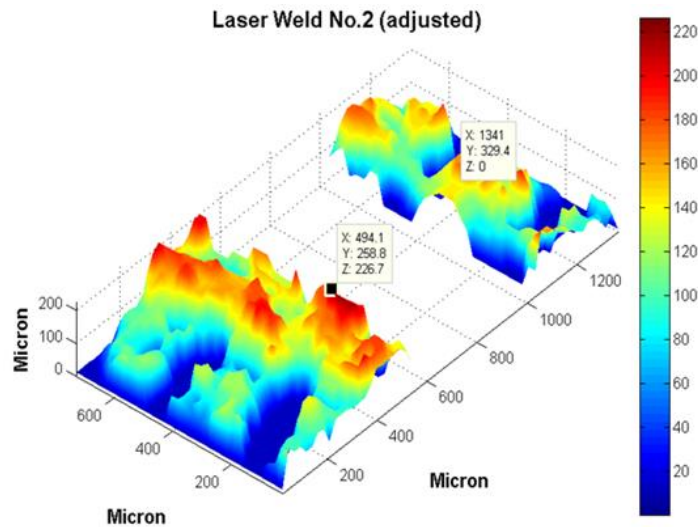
Adjusted measurement result of laser weld No. 2 via fringe projection system
